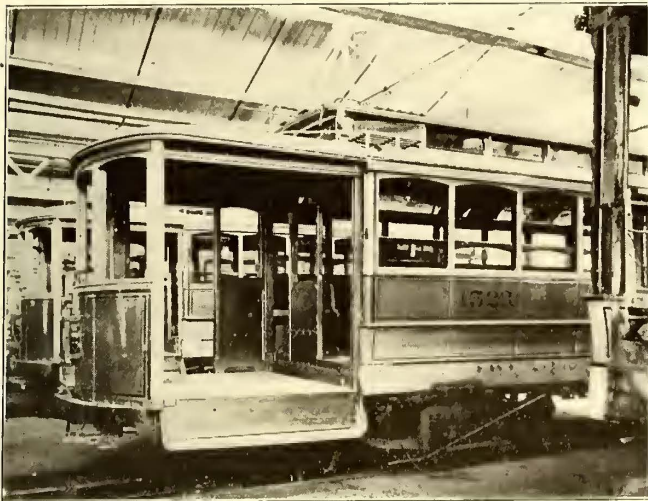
New Jersey Pay-As-You-Enter Cars—Rebuilt Platform of Single-End Car, Showing Door Locations
